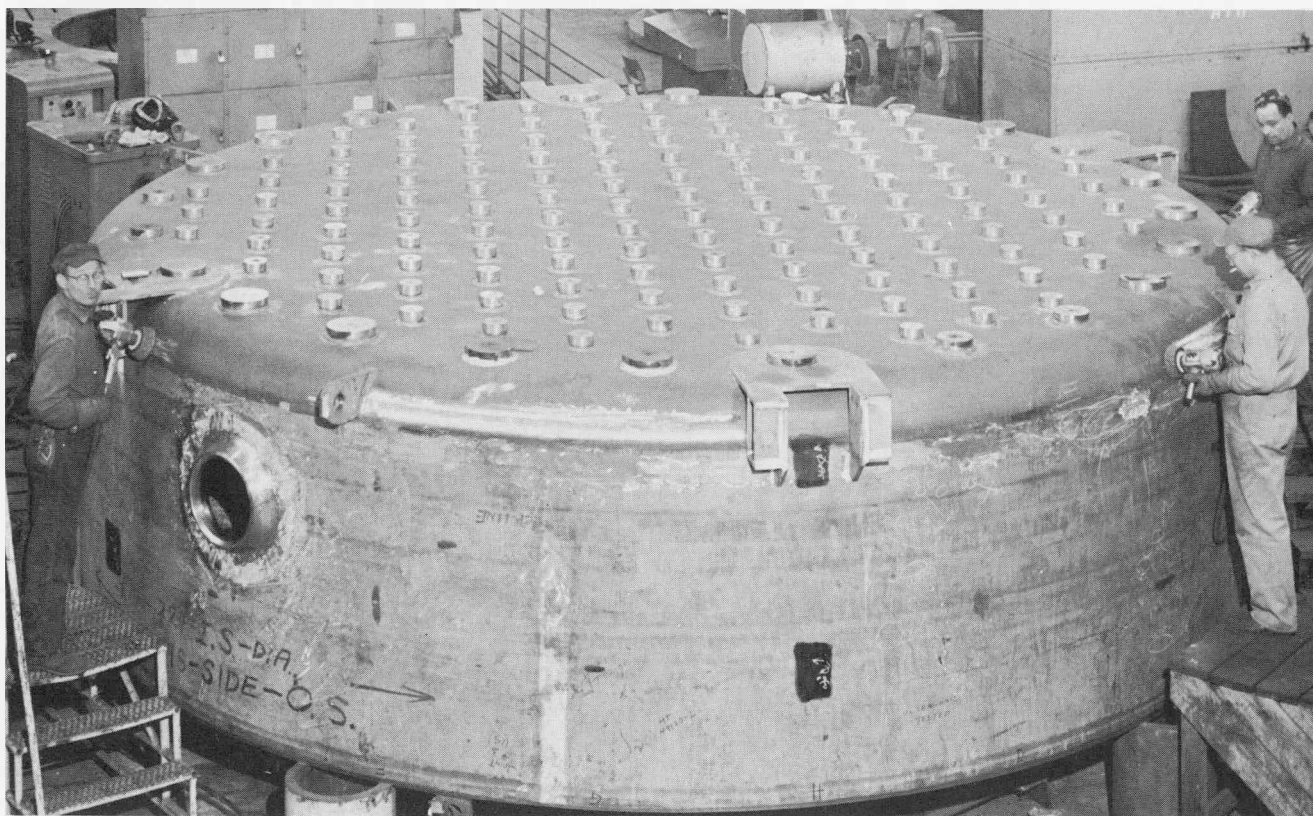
Reactor Vessel, (lower section, 2 in. thick, 228 in. OD, Type 304 SS, showing one sodium inlet nozzle, keyways, and support bosses)
